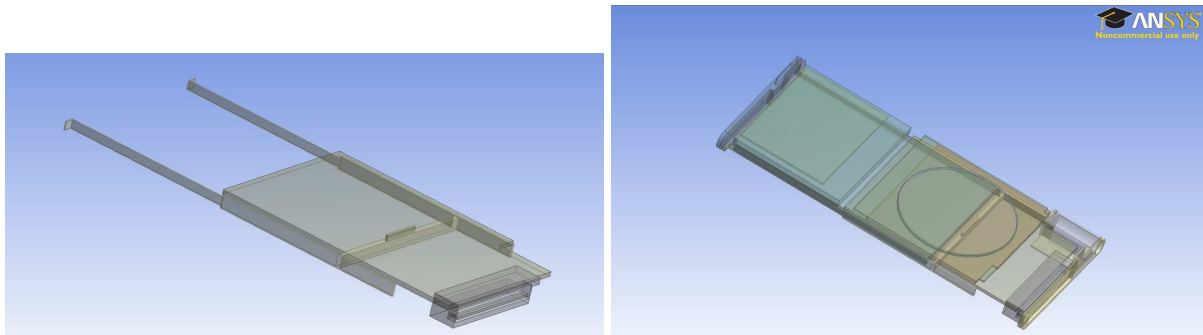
(a) PCB, Metal & Charger Part (b) Assembly
